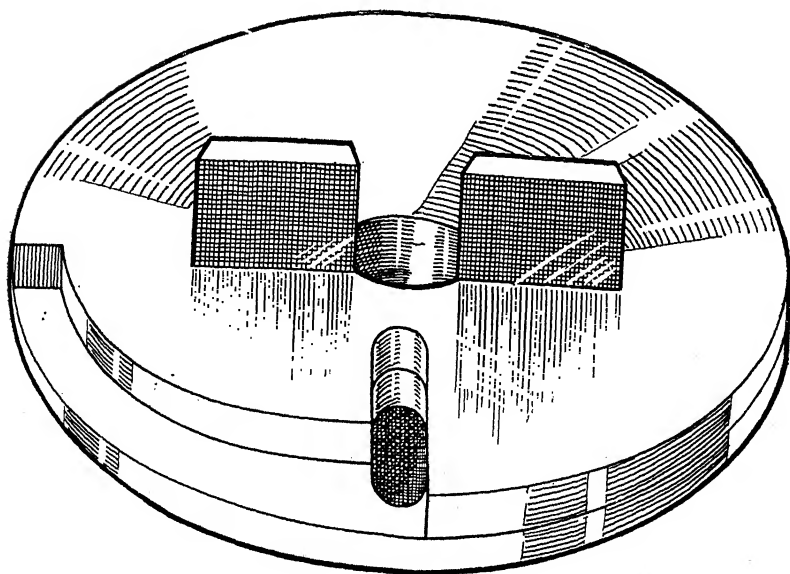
ENLARGED VIEW OF ALTITUDE CONTROL DISC VALVE AND PLATE ON WHICH IT SEATS
